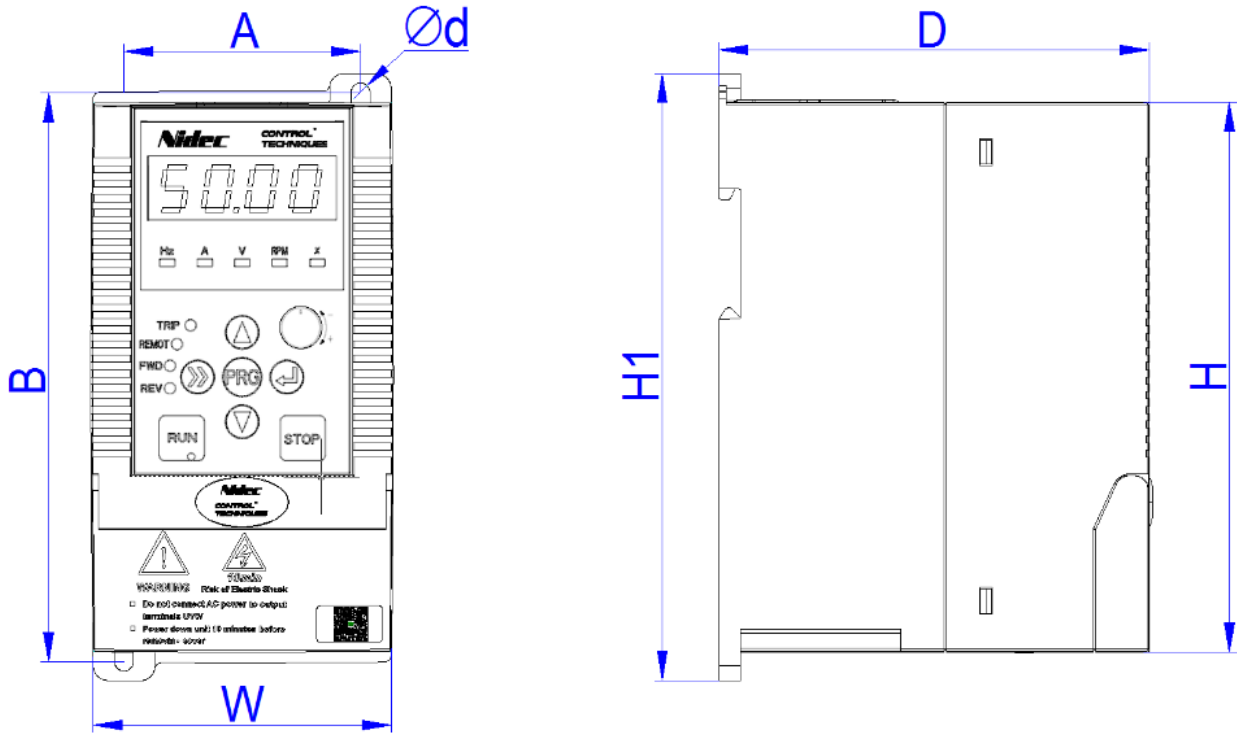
Product Outline, Mounting Dimension Schematic diagram
